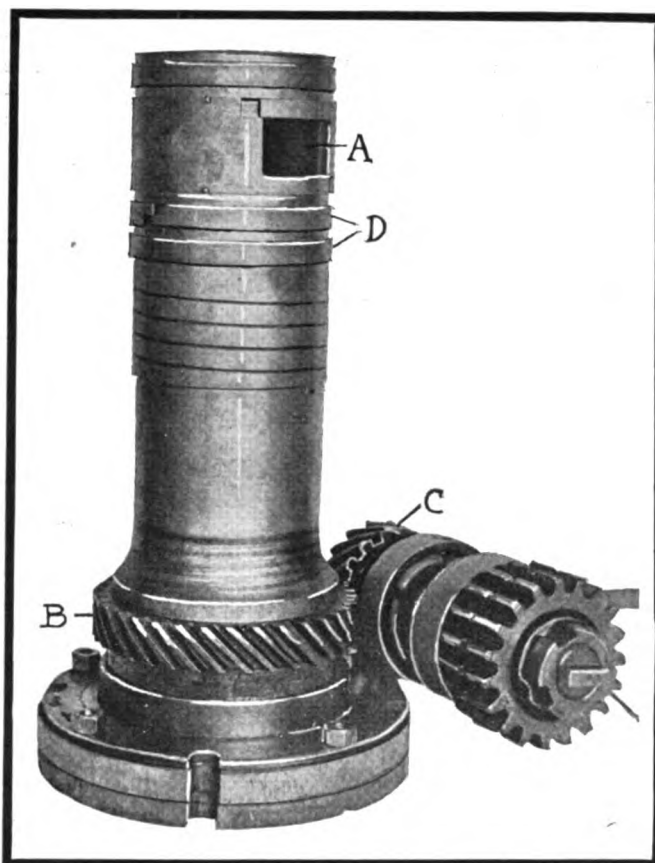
Showing the drive of the rotary sleeve on the C. L. C. motor
